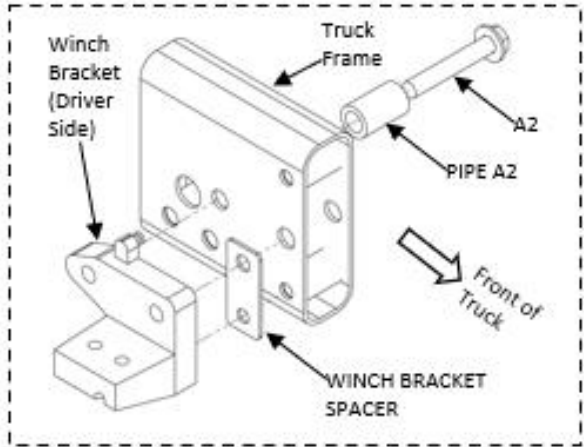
Pipe A2 and Winch Bracket Spacer installation (driver side view)
